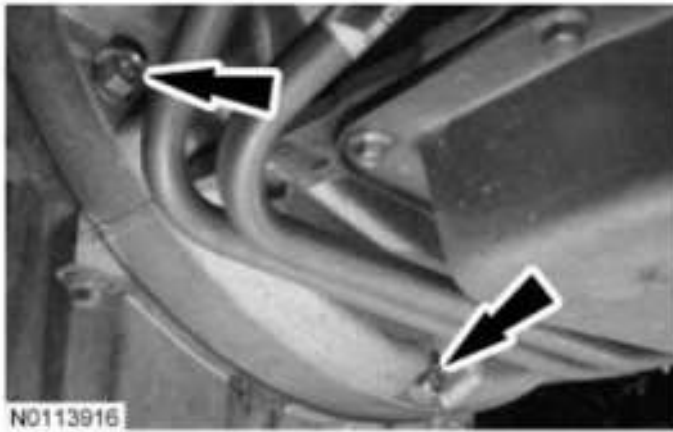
Locating Bell Housing-To-Oil Pan Bolts
